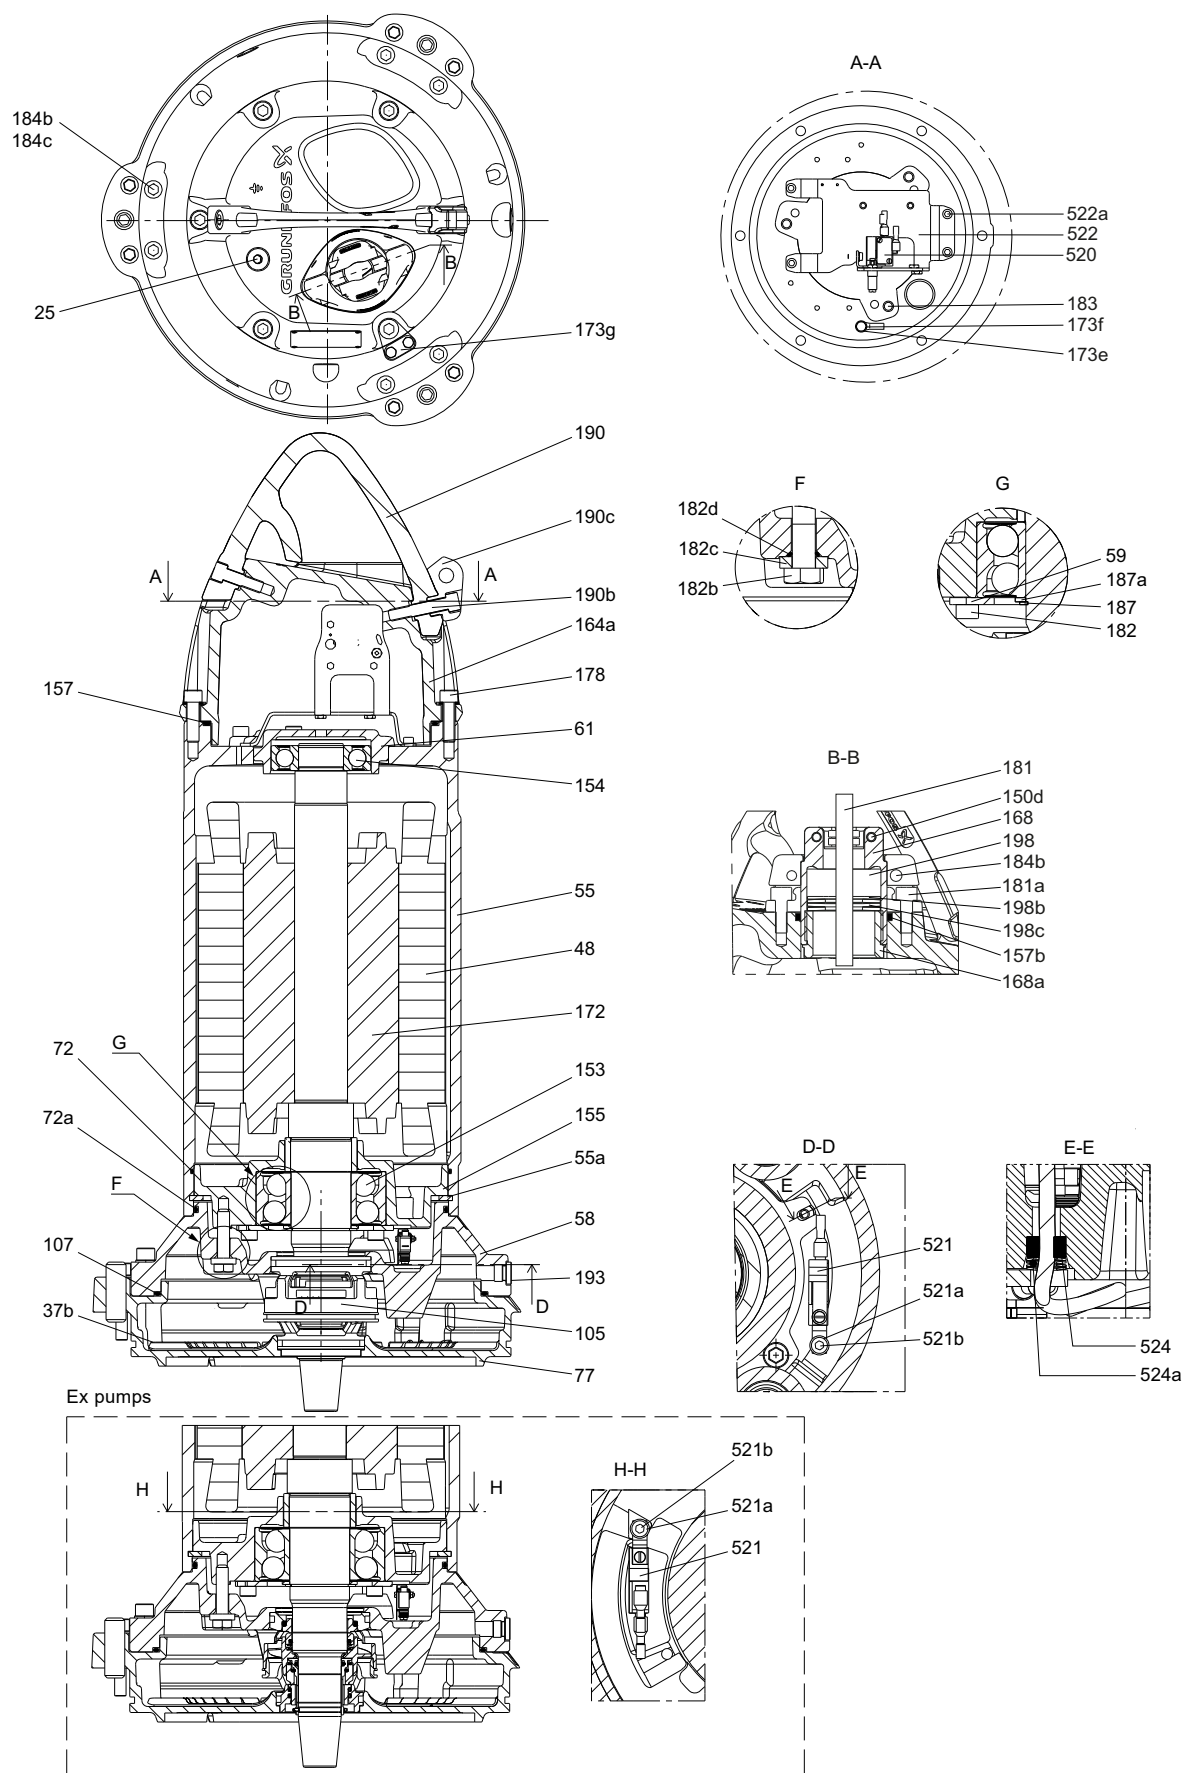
SL pump, without cooling jacket (6-pole motors) (H-H: Explosion proof version)
